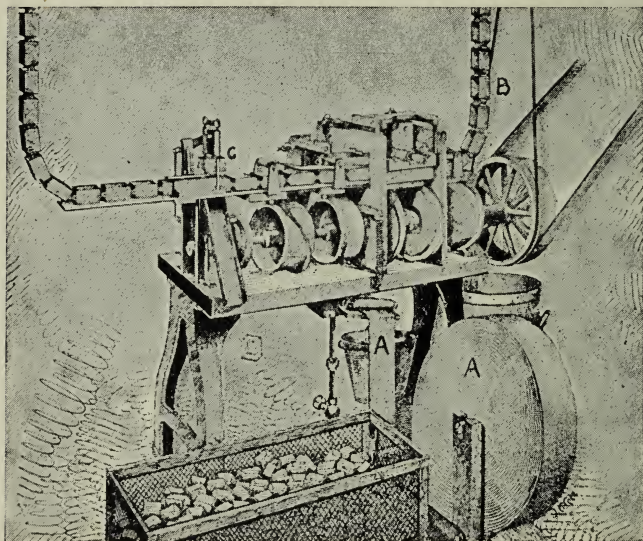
Tray-making Machine.—A is a roll of cardboard strip; B, a belt of metal "formers;" C, the die which bends cardboard sheet into shape.
